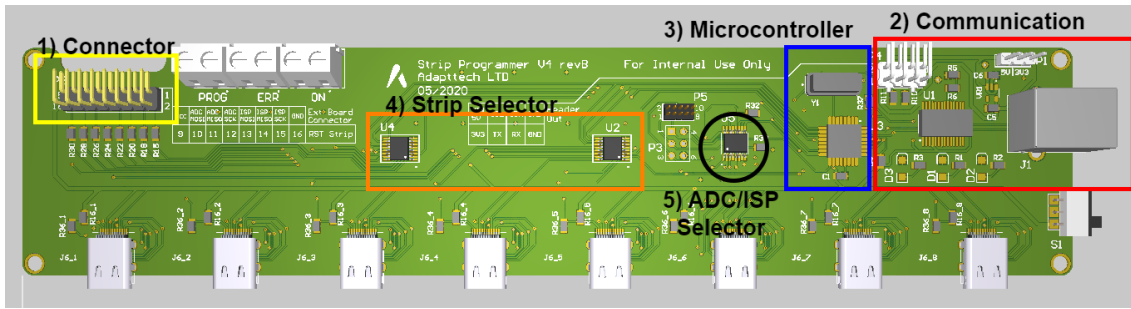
Front view of Strip Flasher Board (length: 220mm)
